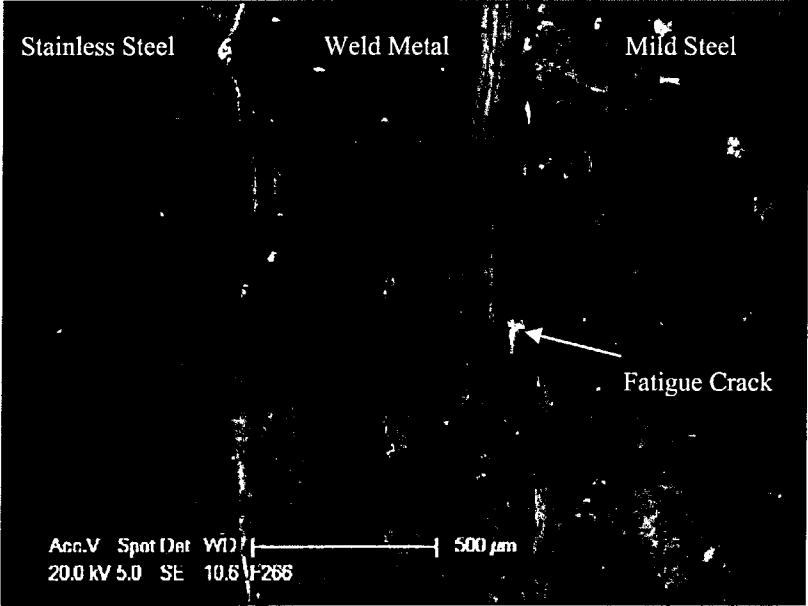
SEM image showing the underside of the weld bead of samples F2.6.6
